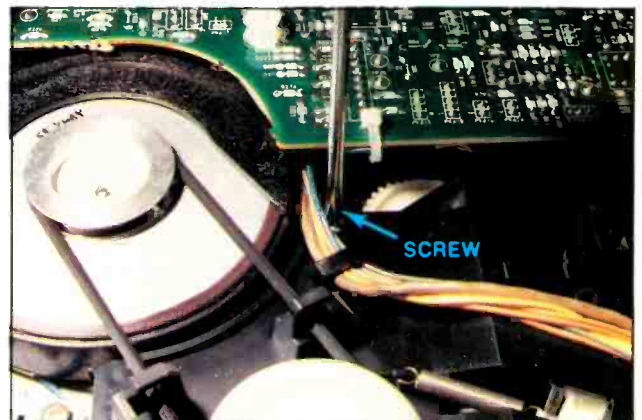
Remove the Phillips screw holding down the plastic reel assembly bracket.
